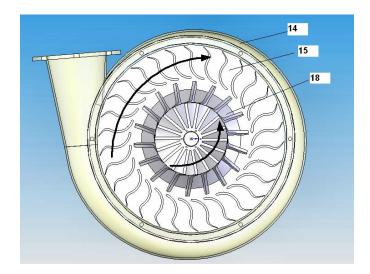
Compressor housing and compressor's HP and LP stages rotors
